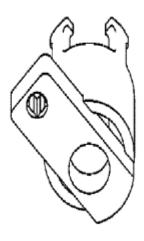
HOLDING FIXTURE 9707 Courtesy of CHRYSLER LLC
